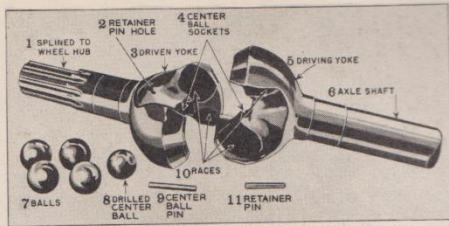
AXLE SHAFT UNIVERSAL JOINT
